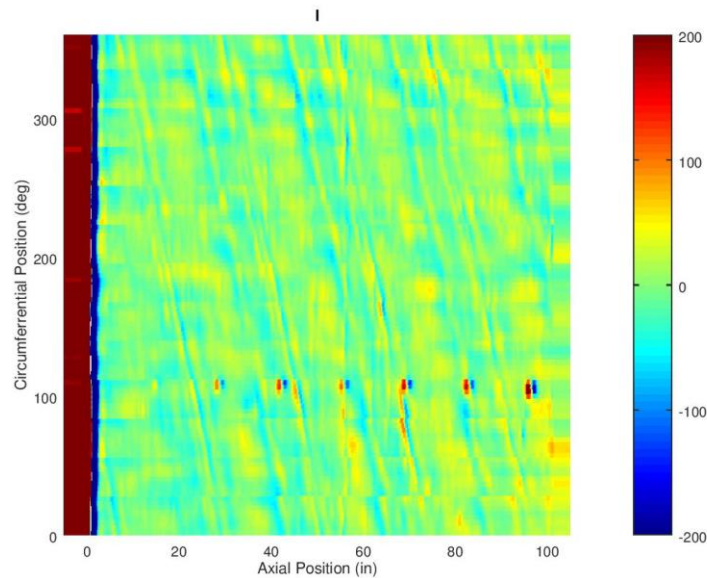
MACHINED DEFECTS IN 8IN PIPE
